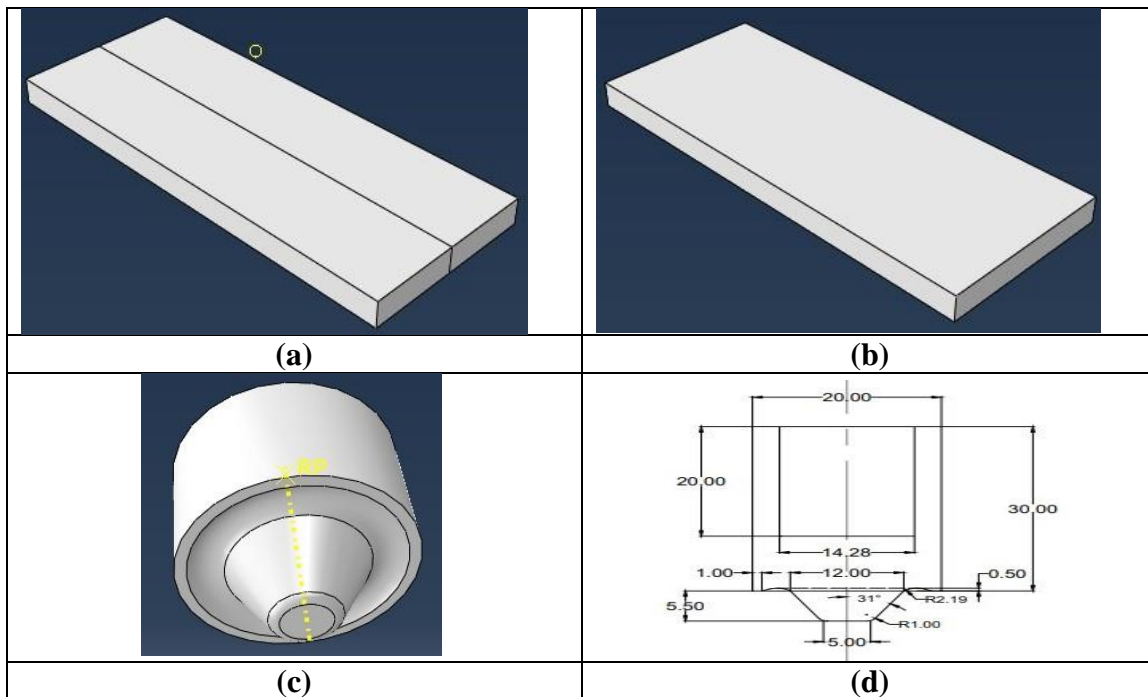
Coupled Eulerian-Lagrangian parts: a) Work piece; b) Reference; c) Tungsten Carbide Tool; d) Tool Geometry, [18].
